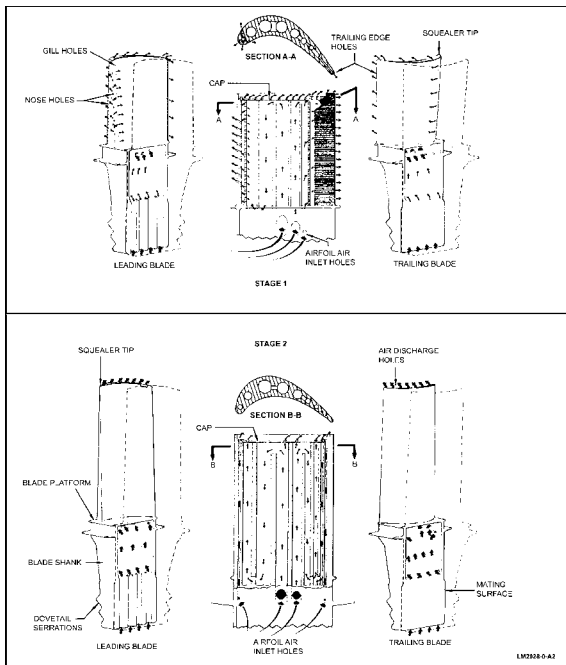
High Pressure Turbine Rotor Blade Cooling (Paired Blade)
